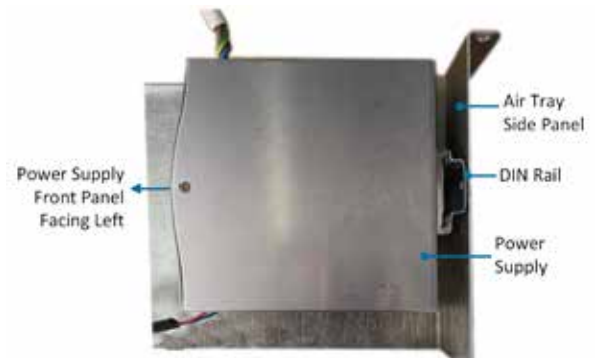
Assembled DIN Rail Power Supply and Air Tray (Top View)
